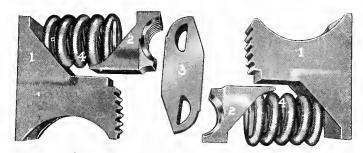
Anderson Friction Draft Gear, Type A, Unassembled. Mid-Western Car Supply Company.
